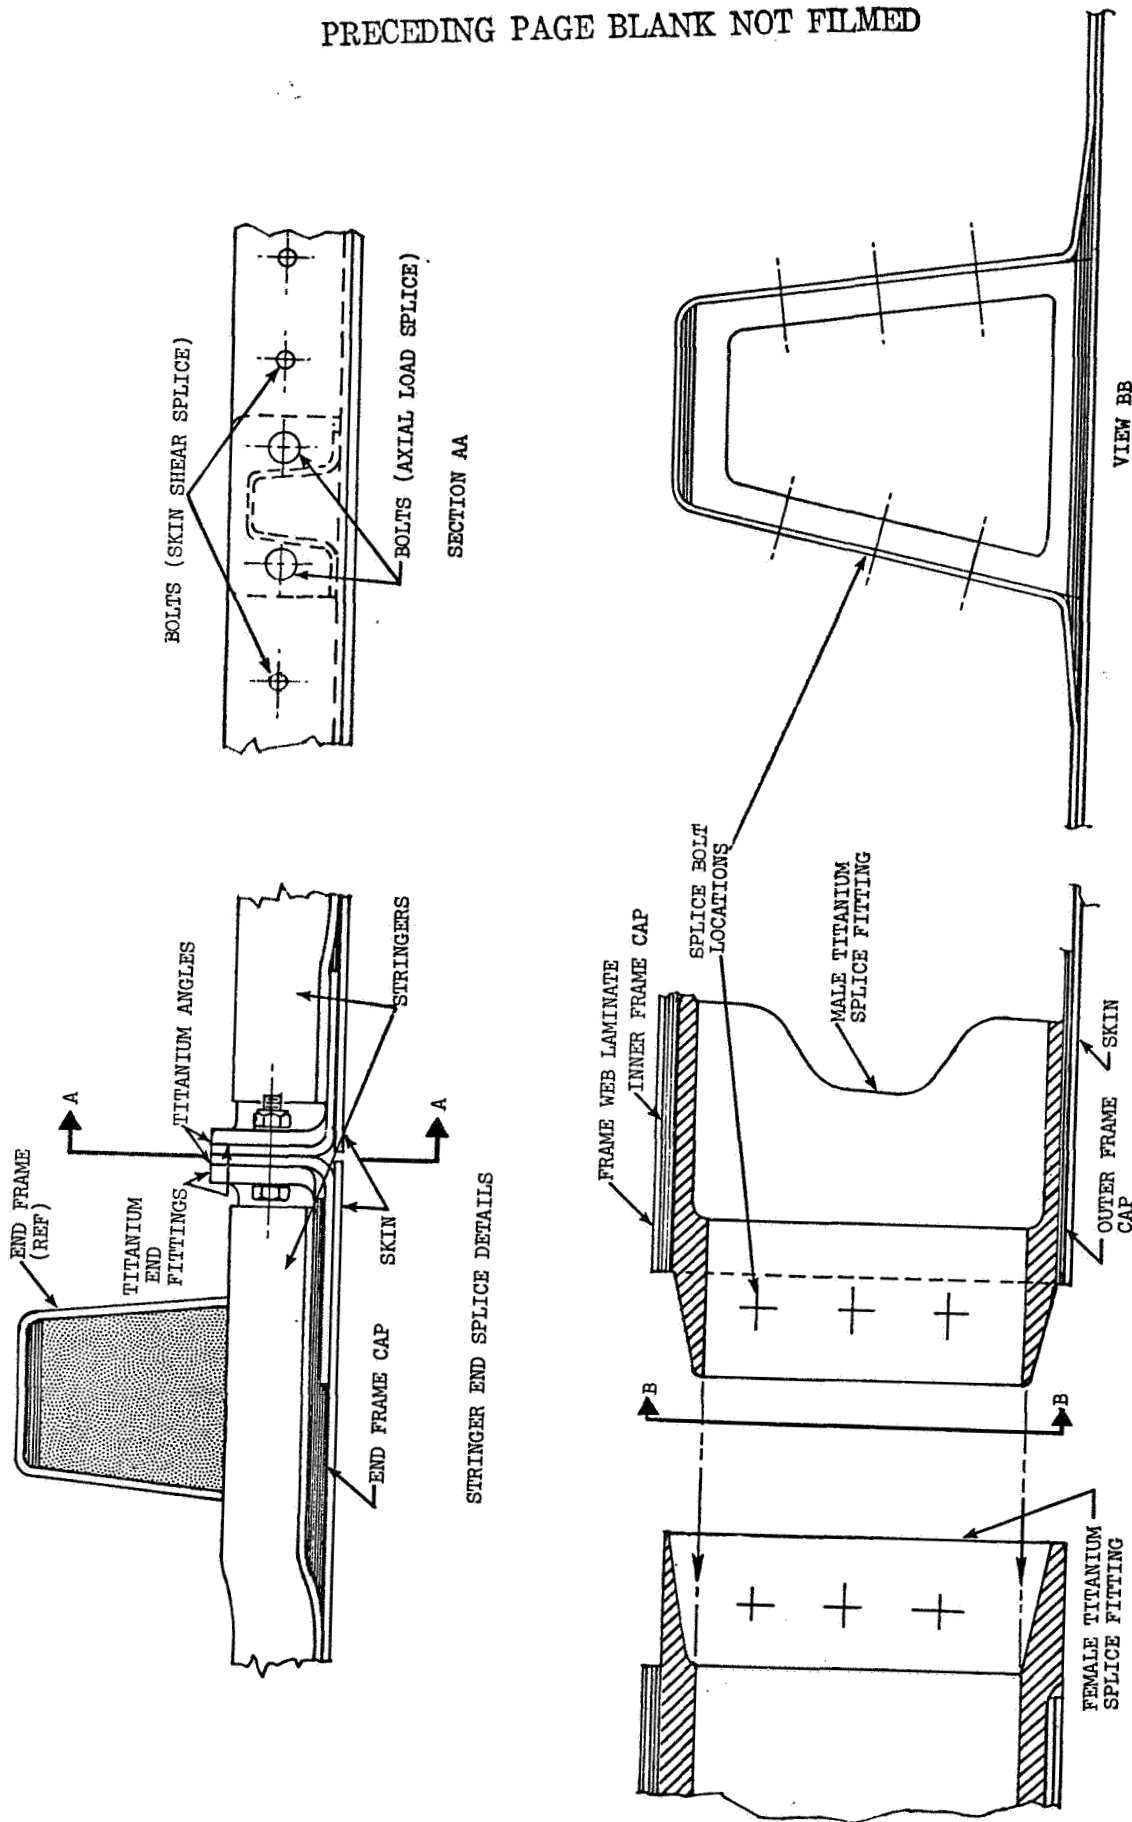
COMPOSITE SHELL CONSTRUCTION. SPLICE DETAILS.
